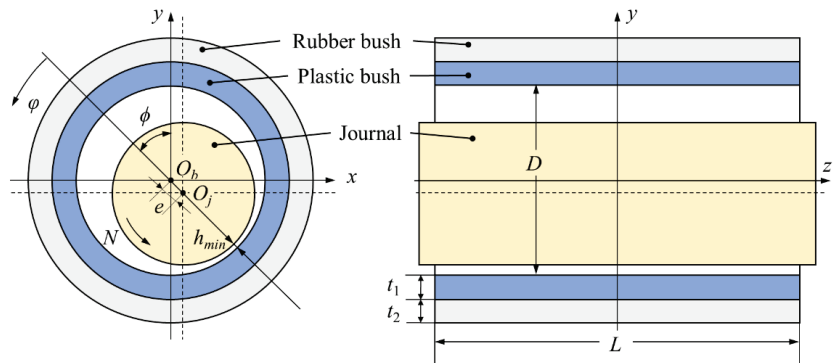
Rubber-plastic double-layer water-lubricated journal bearing geometry.
